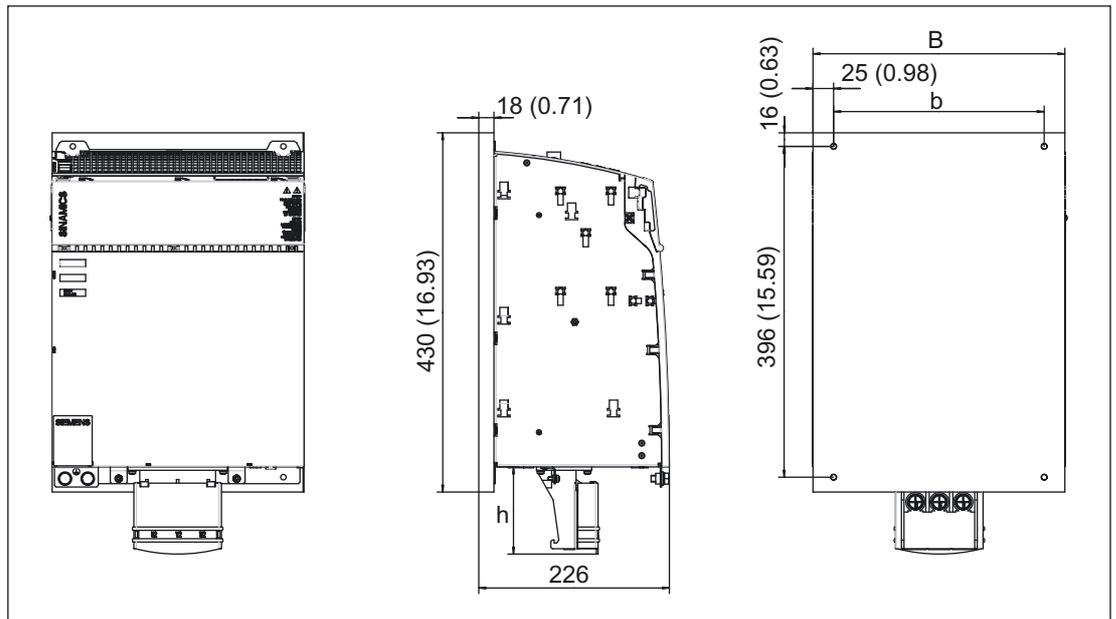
Dimension drawing of Motor Module with cold plate 132 A and 200 A, all dimensions in mm and (inches)
